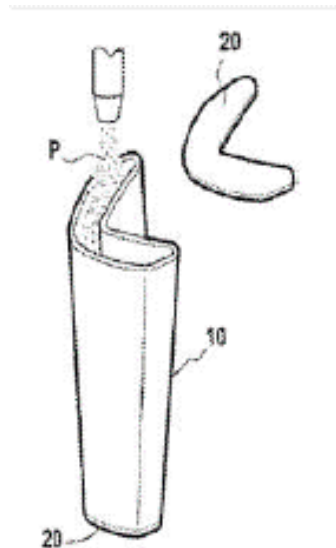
Filling of Powder Form Explosive Inside a Pre-rolled Tube [10]
